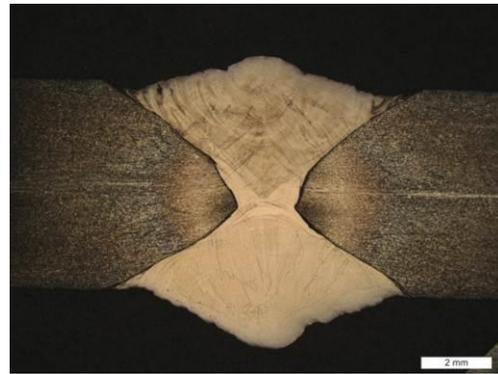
shows the welding process with a Cr-free ENiCuRu electrode. Cross sections of SMA and GMA welds produced with the ENiCuRu and ERNiCuRu electrodes are shown in Figure 2.2. Both consumables produce welds that are free of porosity, cracks and other welding defects.
